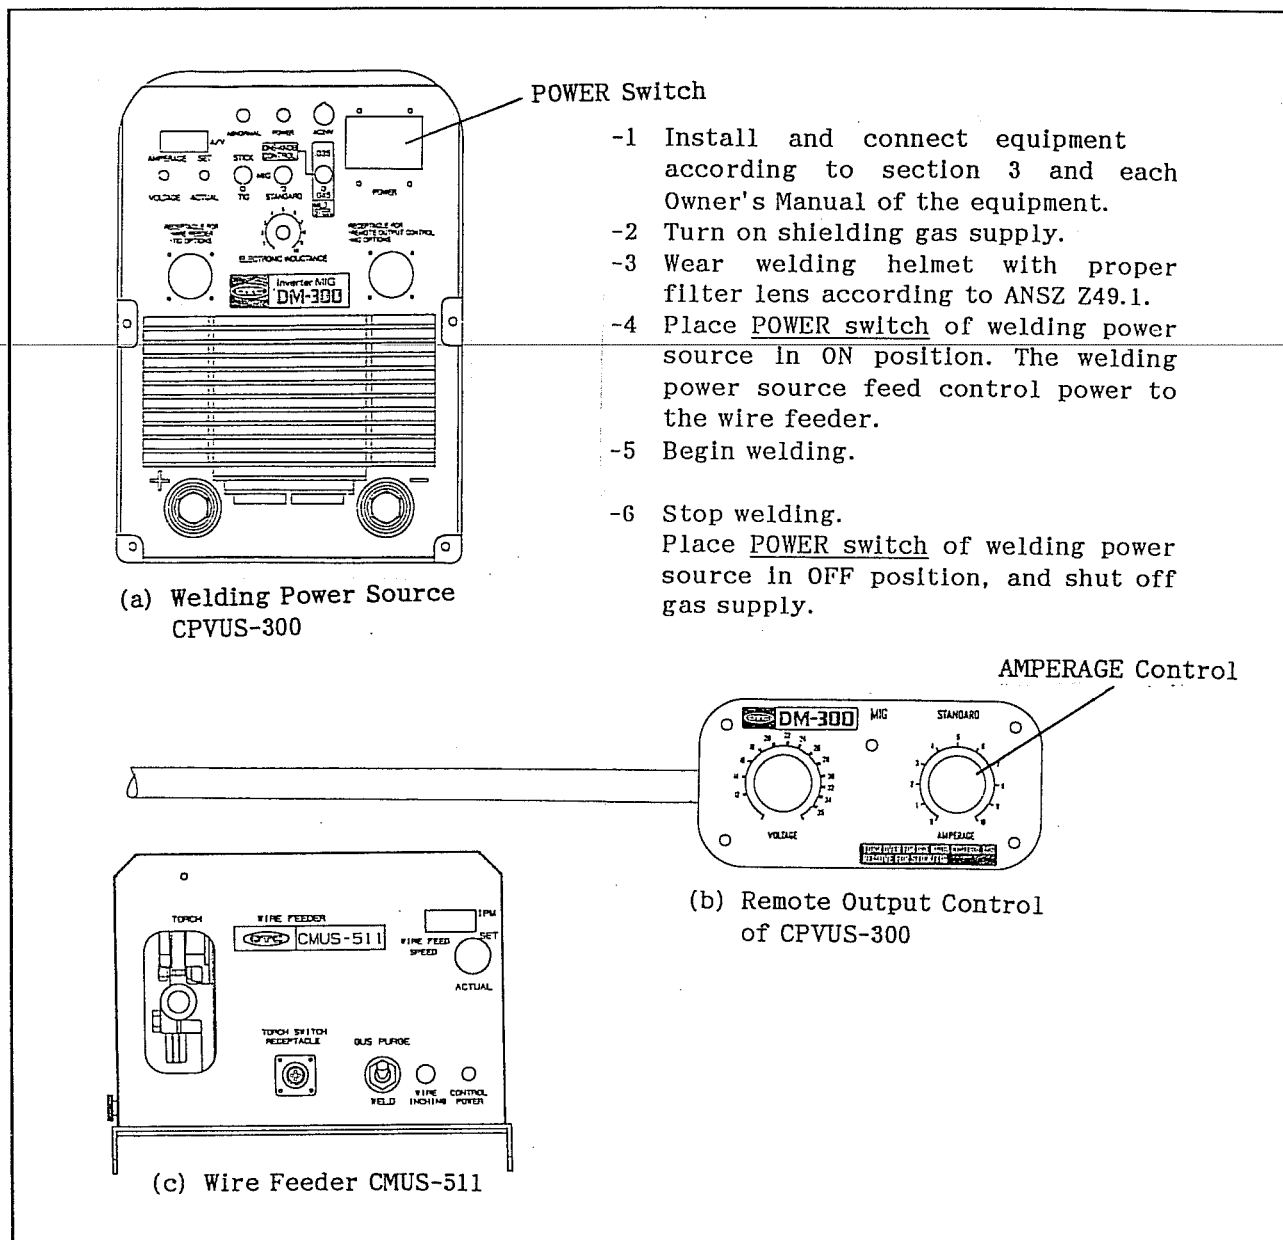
Sequence of Gas Metal Arc Welding (MIG) when welding power source is CPVUS-300
